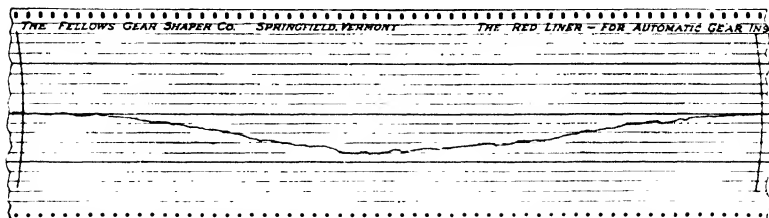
Gear chart showing eccentricity of 0.004 in.
